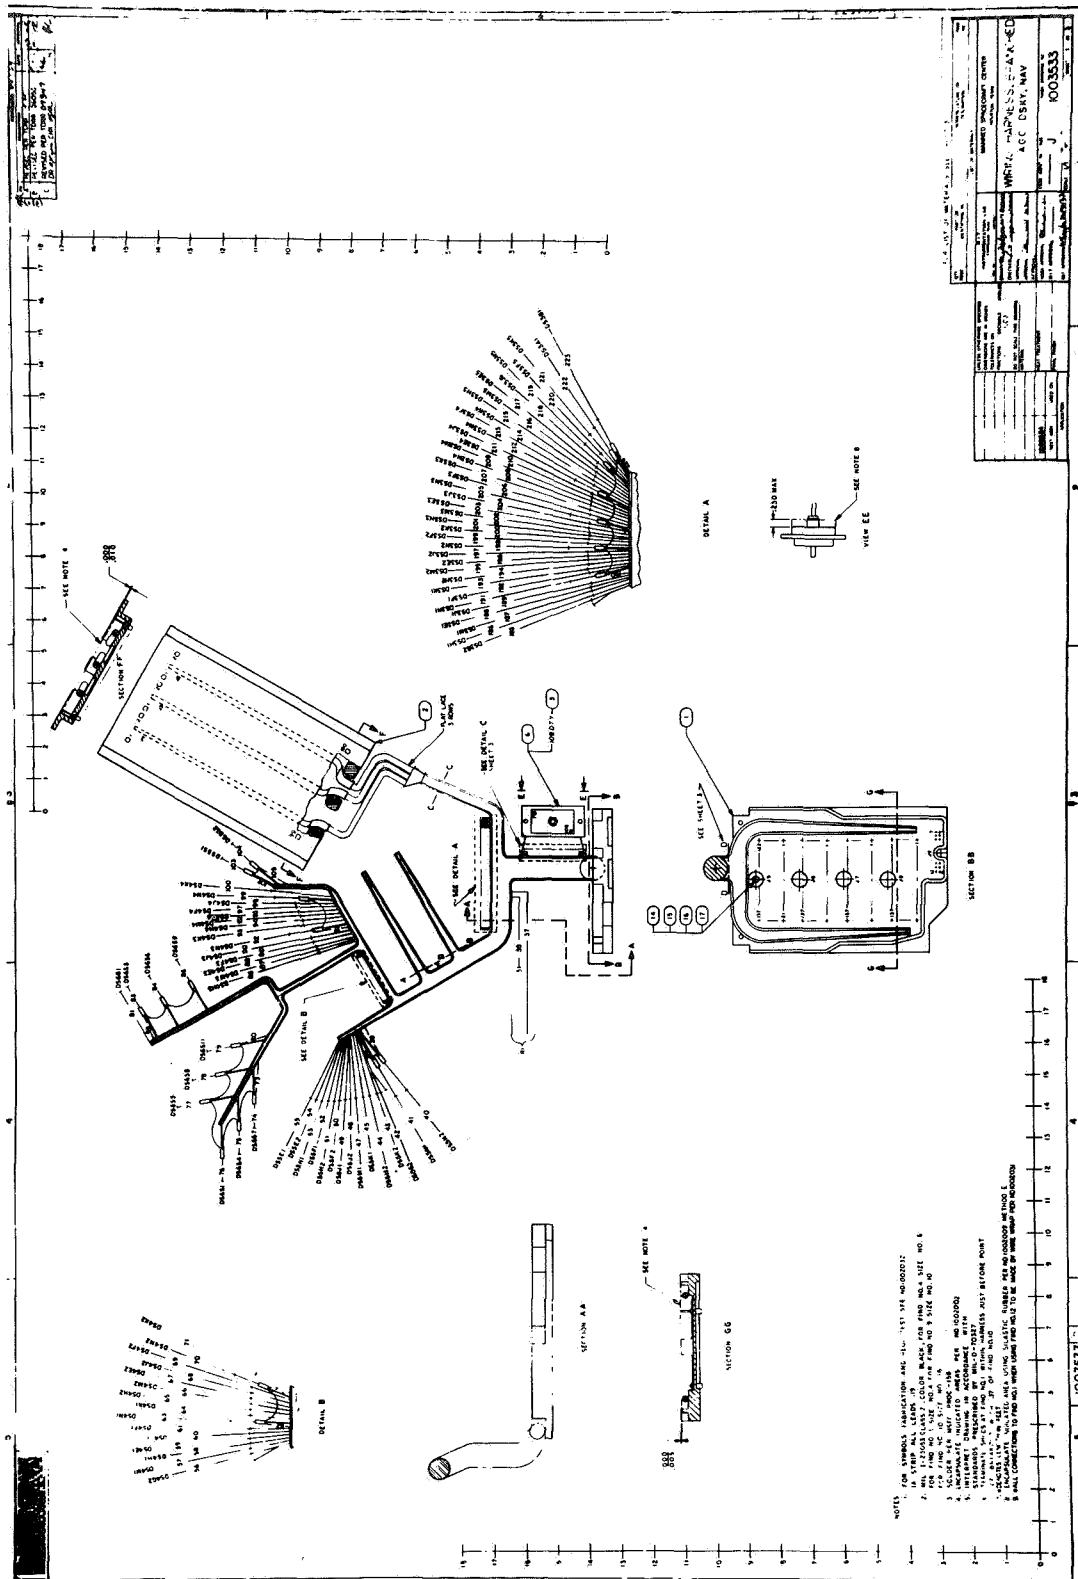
Sample Assembly Drawing, Wiring Harness, Branched (Sheet 1 of 3).
